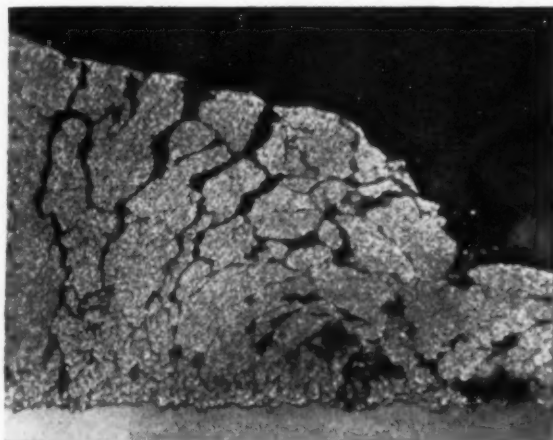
PHOTOMICROGRAPH OF BEARING FROM SAME ENGINE AS THAT OF FIG. 7 (Complete fatigue failure.)
